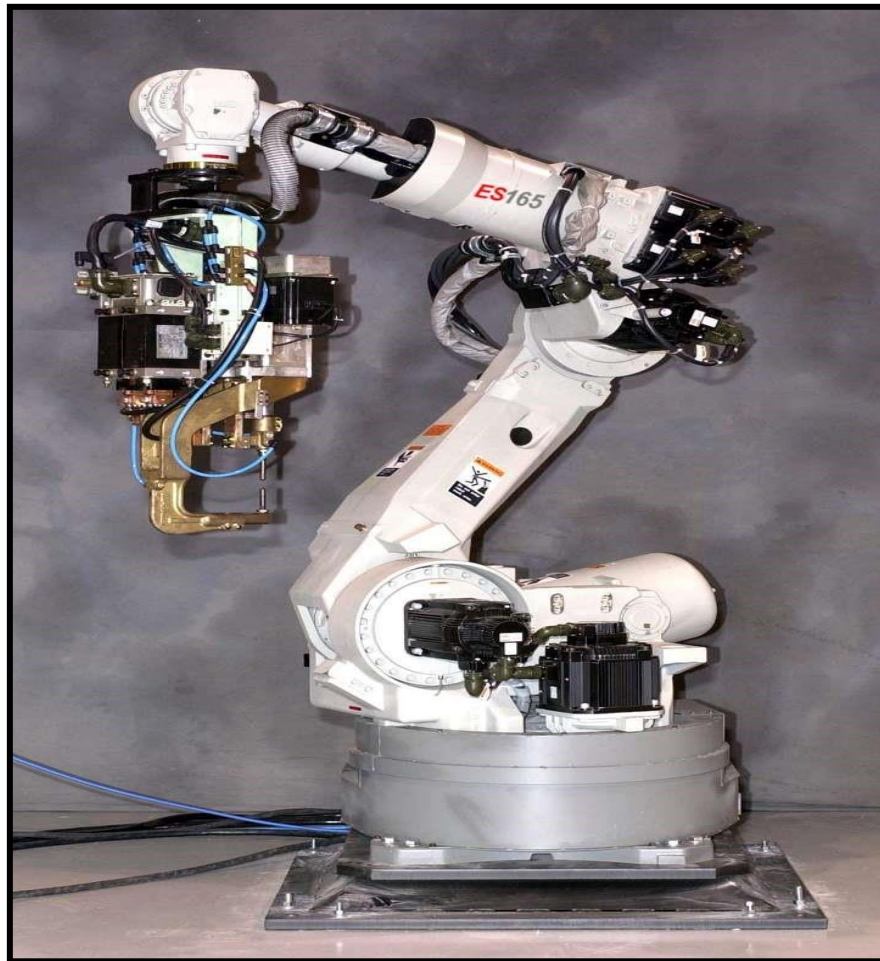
A welding robot system with 7 DOF [23].
